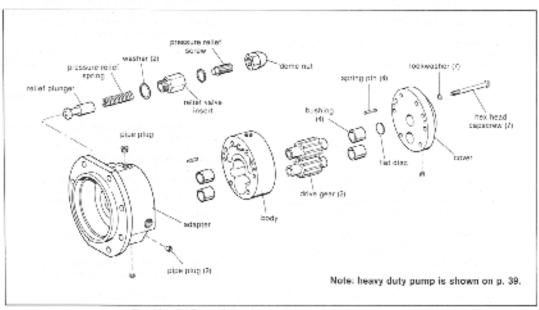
Oil Pump Assembly (Pump no. 1-13041-1000 shown)
